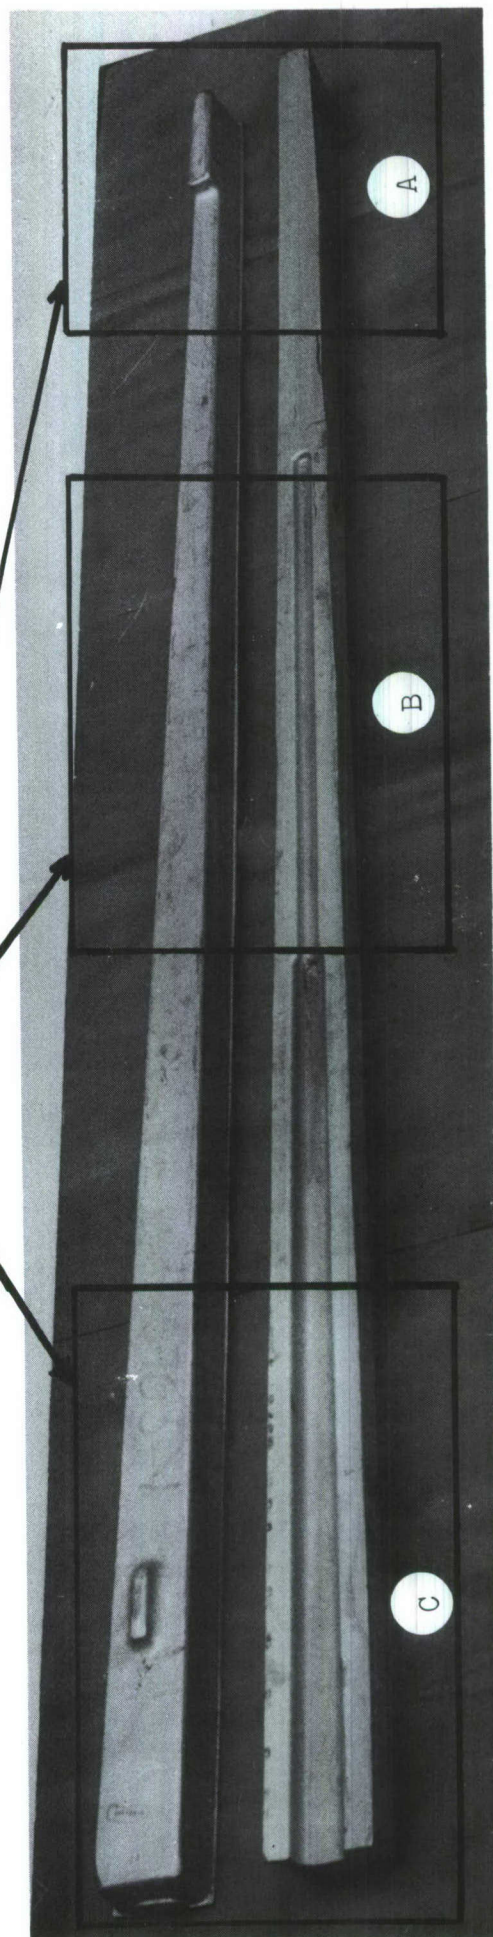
7049-T73 AND 7175-T736 DIE FORGING
